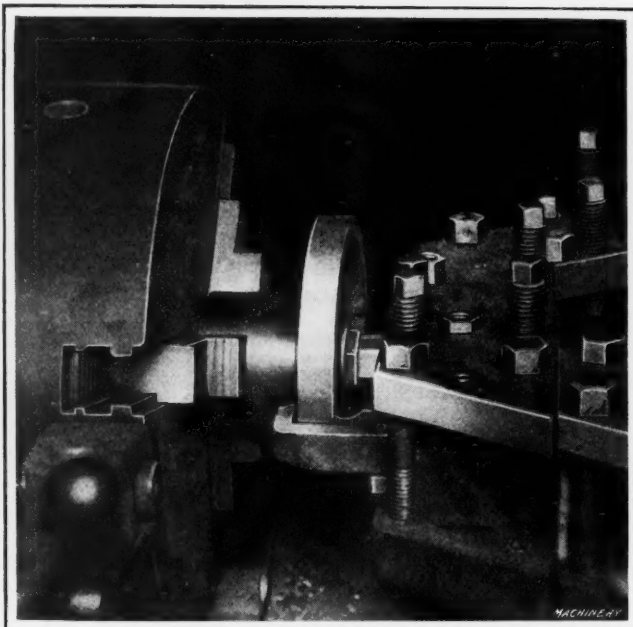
Turret Lathe equipped for facing Camshaft Gear
